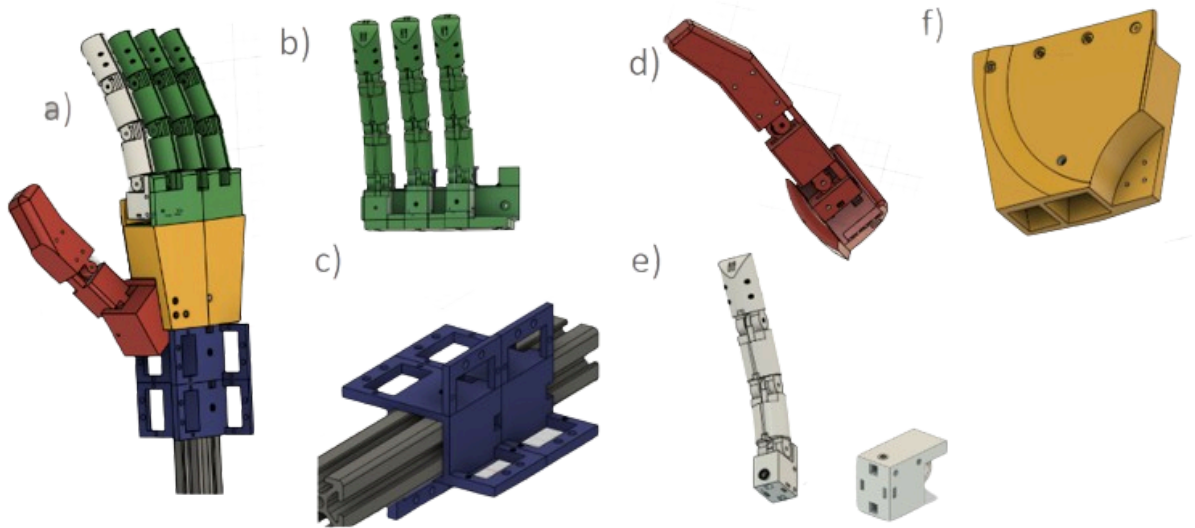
SemuBot's hand structure; a) Full Hand Assembly: The overall structure of SemuBot's hand; b) Group 1 fingers and connection module to the palm assembly; c) Motor Shell: Housing for the motors; d) Thumb and connection module to the palm assembly; e) Index finger; f) Palm
